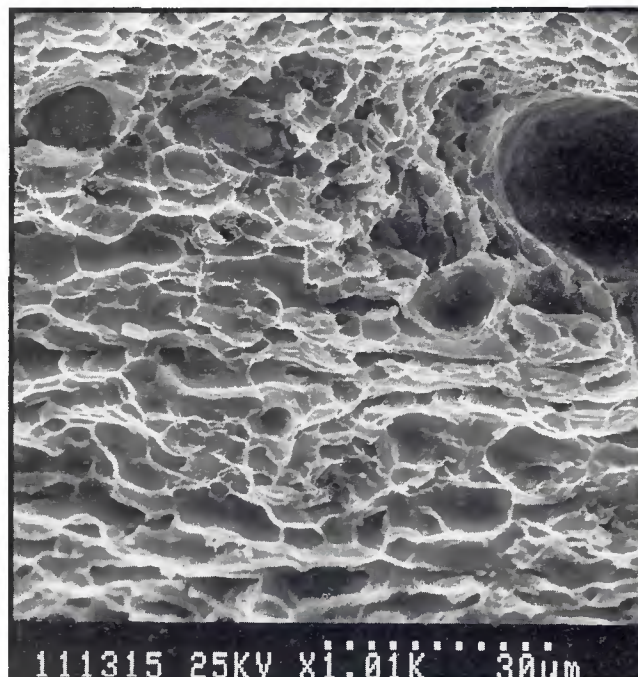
Fracture surface within HAZ of HDC weld.
